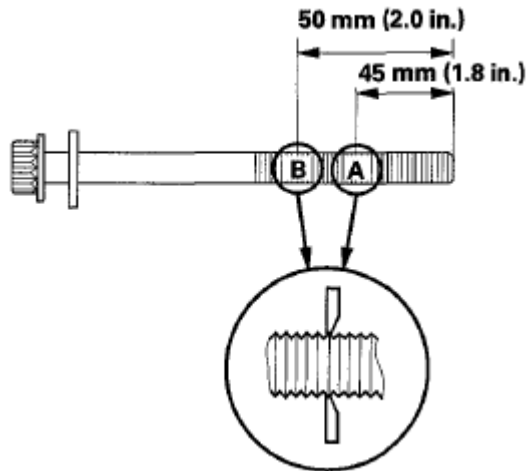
Measuring Diameter Of Cylinder Head Bolt
